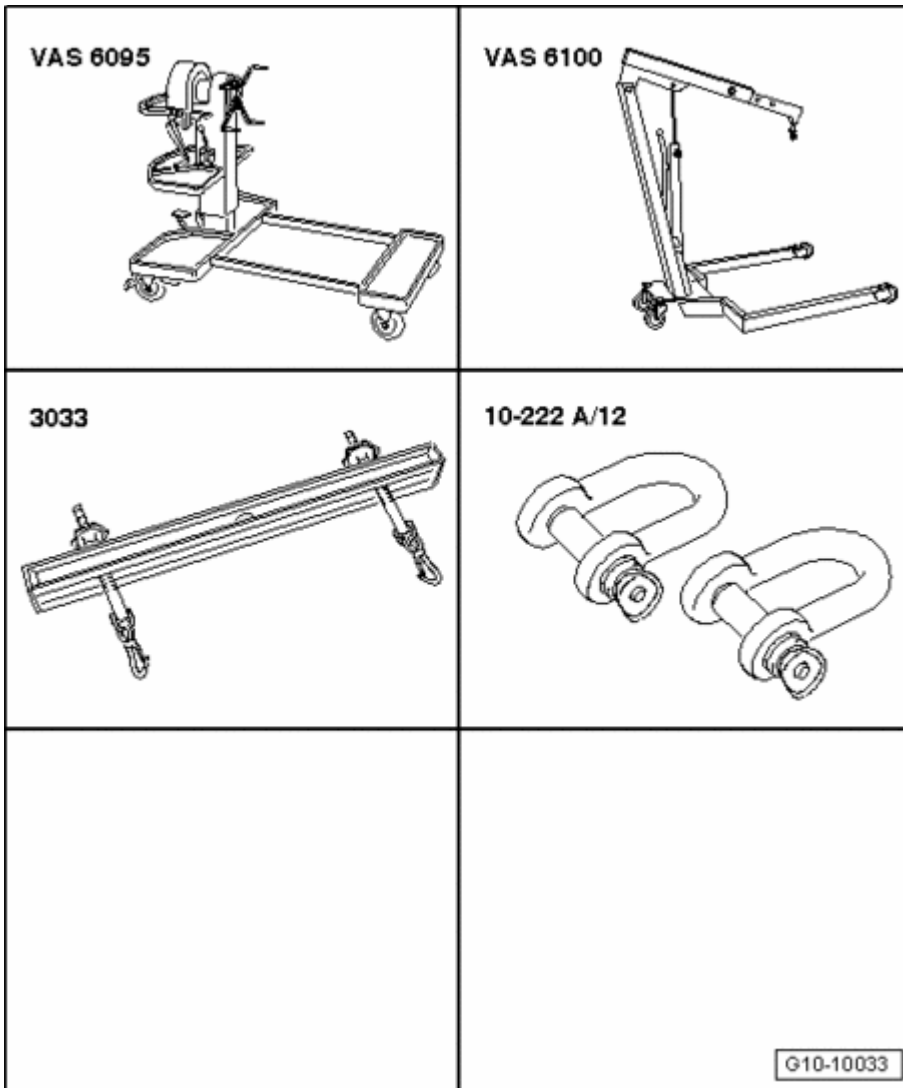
Identifying Special Tools - Engine, Attaching To Engine Stand
